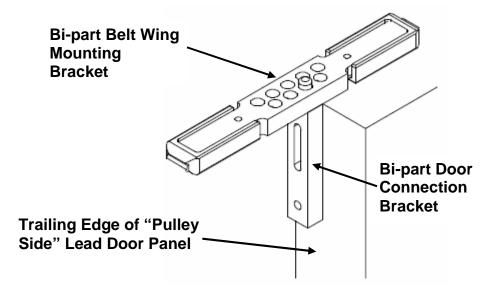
Position of Bi-part Belt Wing and Door Connection Bracket on Trailing Edge of "Pulley Side" Bi-part Door
